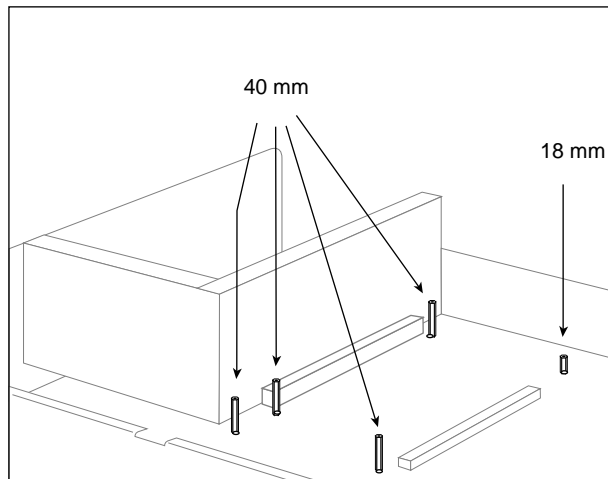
Location and Sizes of CPU Module Standoffs on the IP26 Base Board
